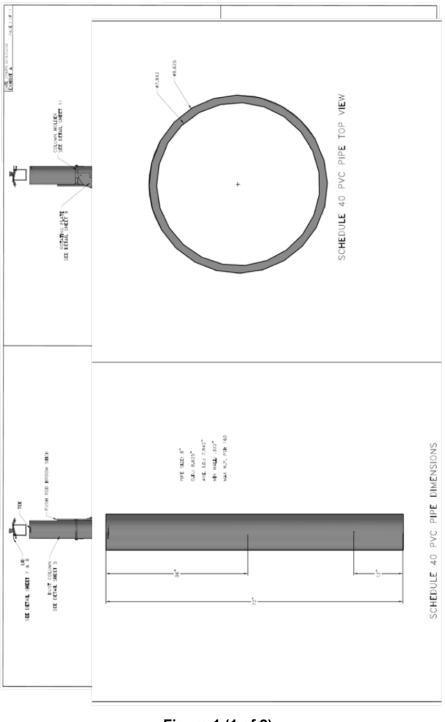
(1 of 2) Drawings of the Testing Device. (All Dimensions in Inches)
